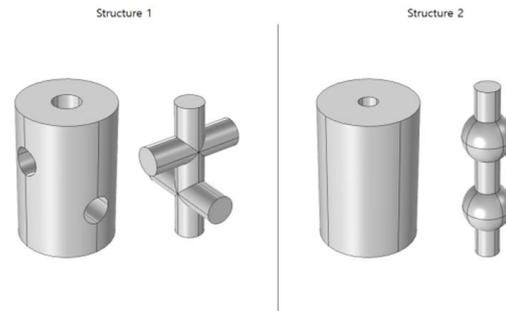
Sample designs for fabrication trials of ceramic objects. Cylindrical pellets were divided into two parts, and total 4 parts of objects were fabricated by additive manufacturing.
